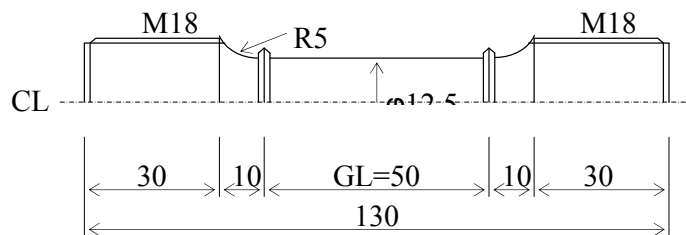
Shape and Dimensions of Specimen: Tensile Tests of Bolt Materials
